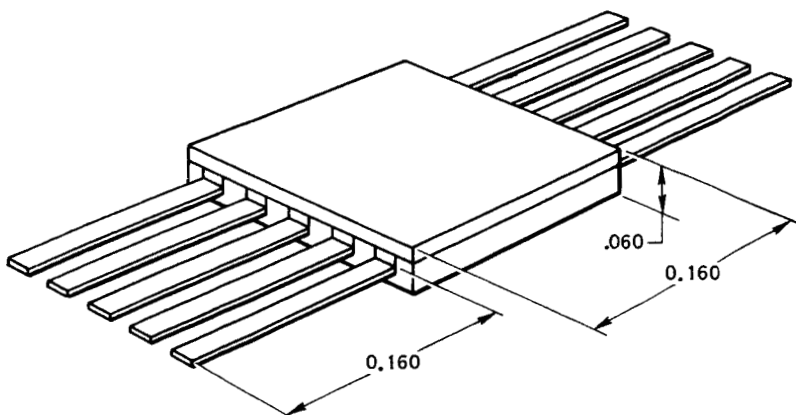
PACKAGING OF INTEGRATED BLOCKS
